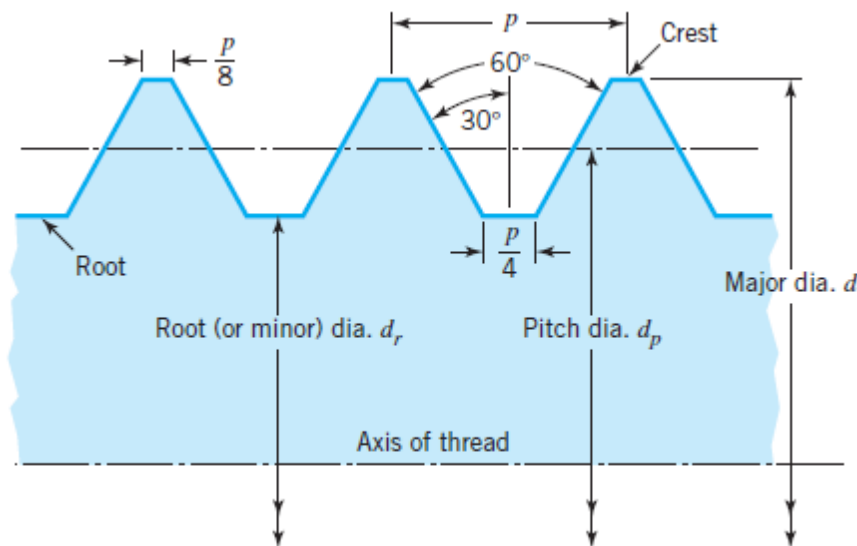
Unified and ISO thread geometry. The basic profile of the external thread is shown.
